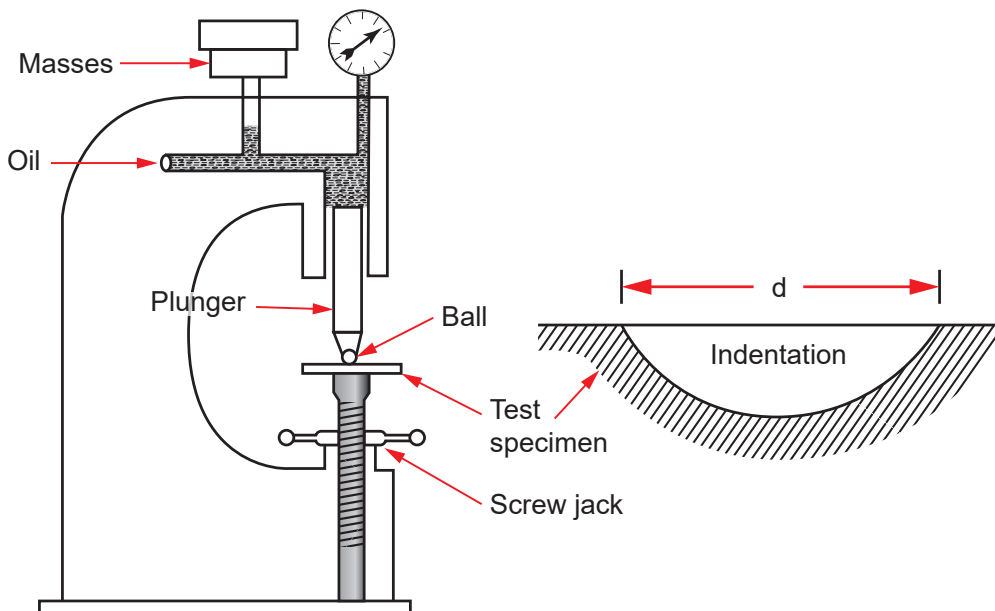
shows a Brinell hardness testing machine. The test coupon is placed on top of the screw jack and raised until it touches a 10 mm tungsten carbide ball (an extremely hard material). Then, a hydraulic pump forces oil above the plunger, pressing the ball into the test specimen. The pressure gauge gives an approximate indication of the load.
